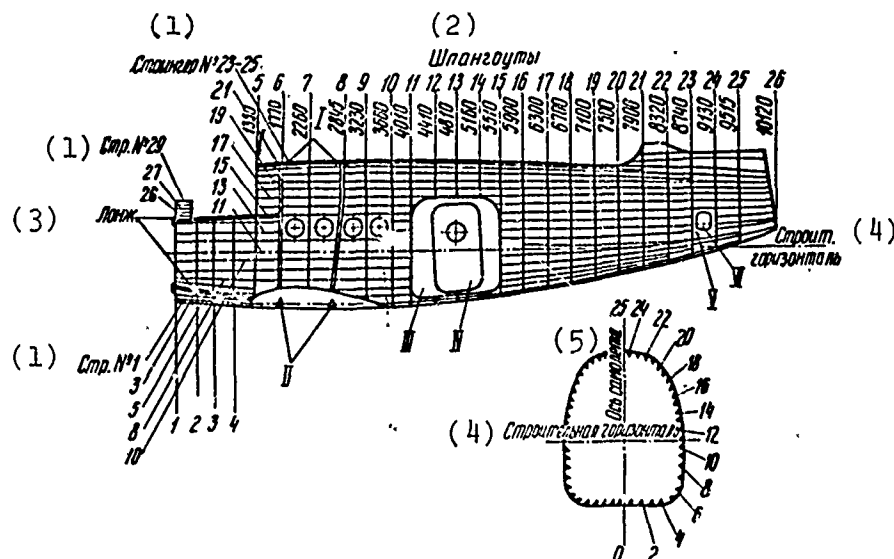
Diagram of the location of stringers and fuselage frames: I - mounting lugs of the upper detachable wing section; II - mounting lugs of the lower detachable wing section; III - cargo door; IV - passenger door; V - hatch for installation of tail wheel; VI - storage battery hatch.
